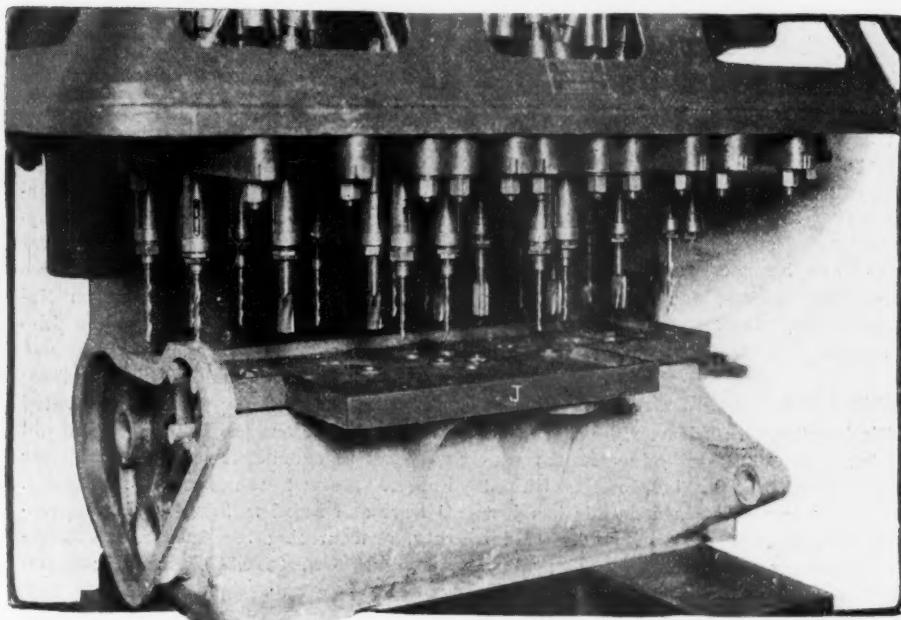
Jig J for drilling holes in the top of the Marmon crankcase
